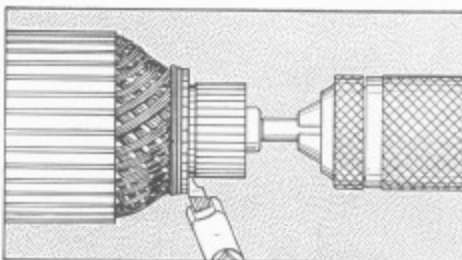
Top view of lathe tool cutter bit for truing armature commutators.
